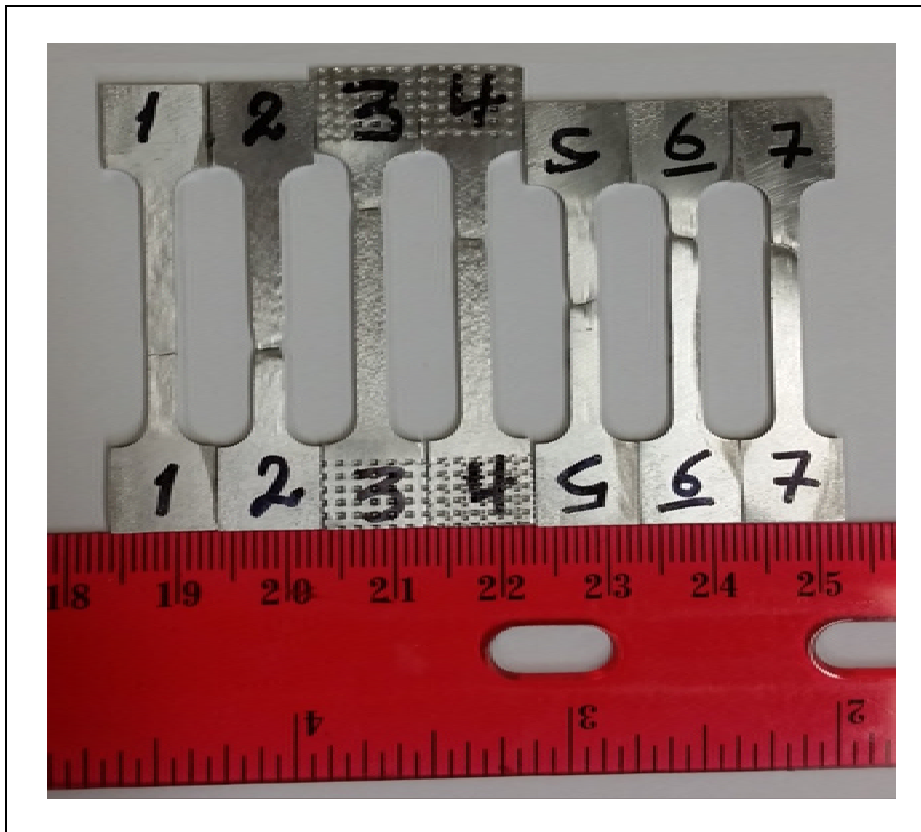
Fracture of MFT specimens parallel to welding line
